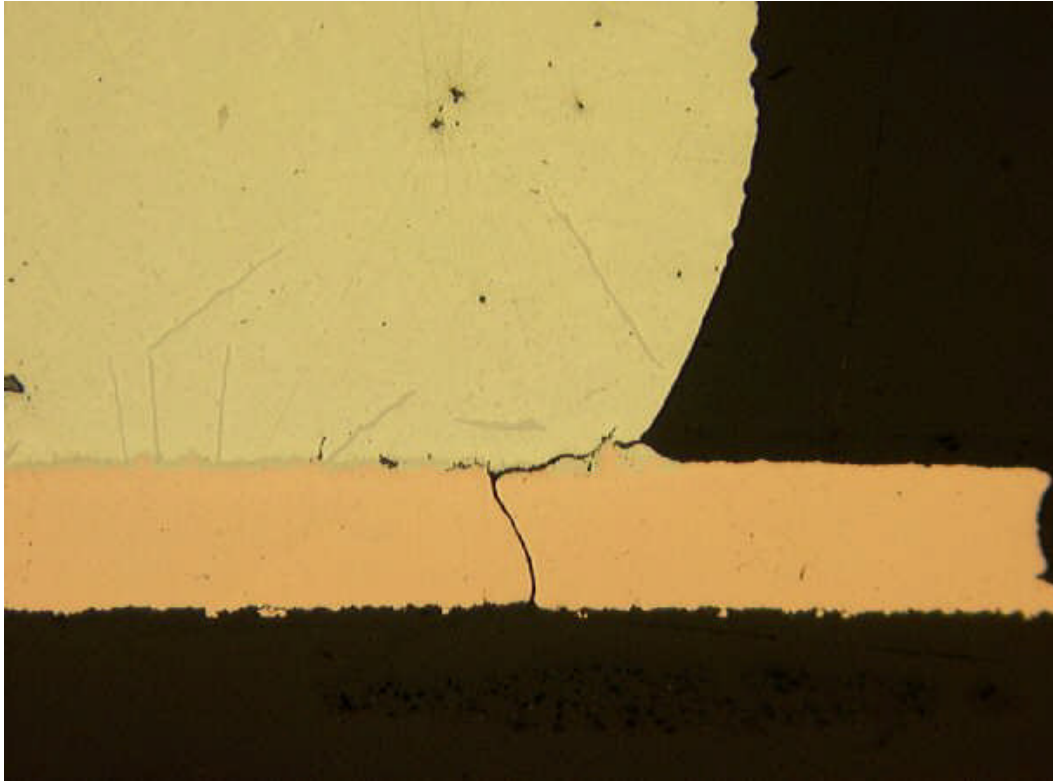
Copper trace fracture in component BGA U43 from Mechanical Shock Board 98.
